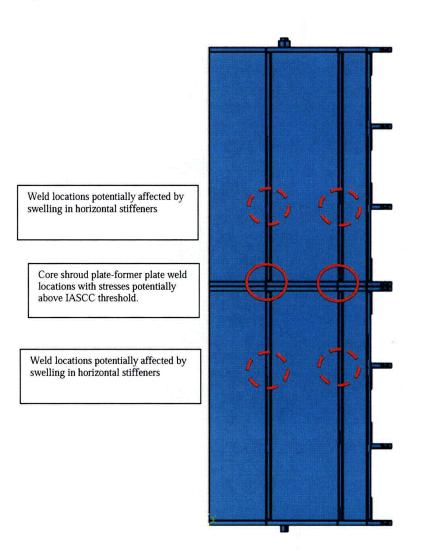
Potential crack locations for CE welded core shroud assembled in stacked sections
